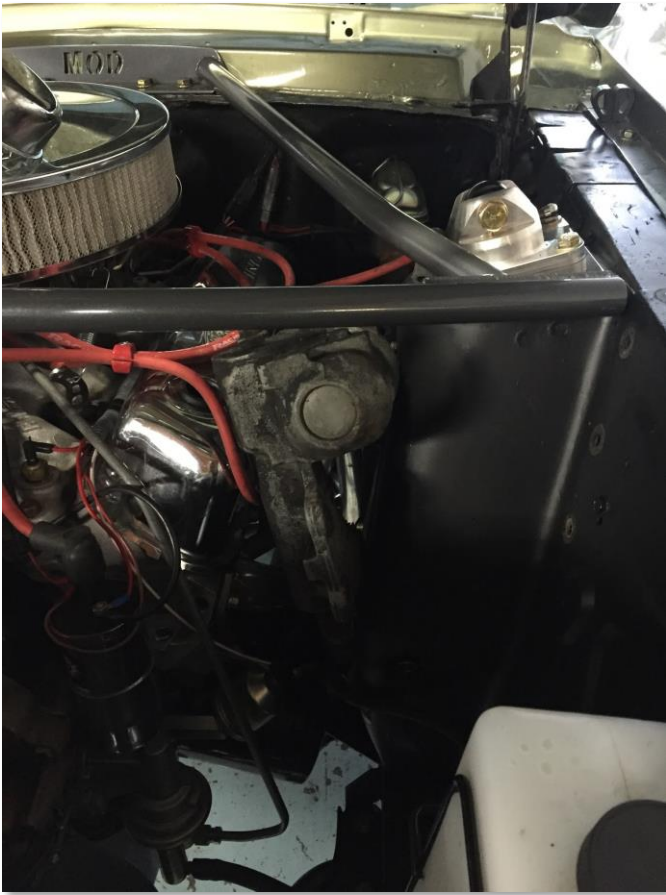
A view of the steering box being removed from a 64-66 Mustang
